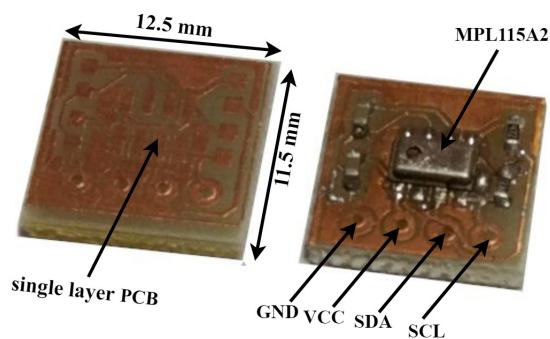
Single layer printed circuit board, which have 4 pin header, designed to protect electrical connection (left), MEMS barometer on a PCB (right).
